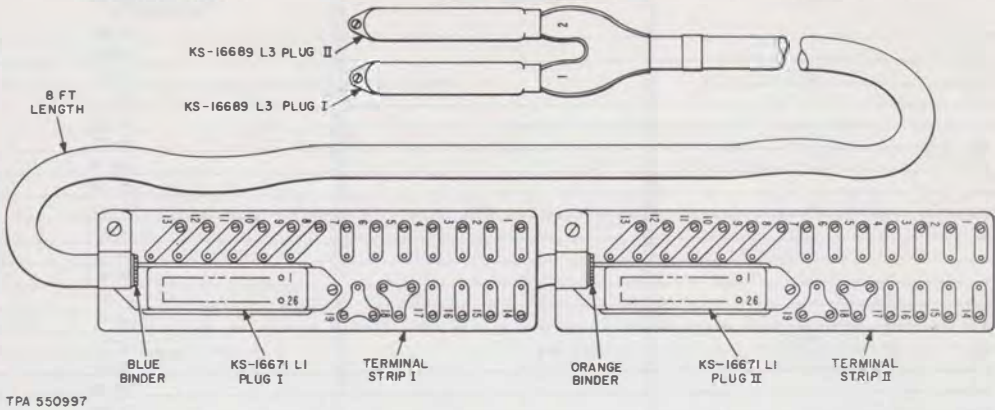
B50B Connector Cable—View of Terminal Strip, Local Wiring Side
